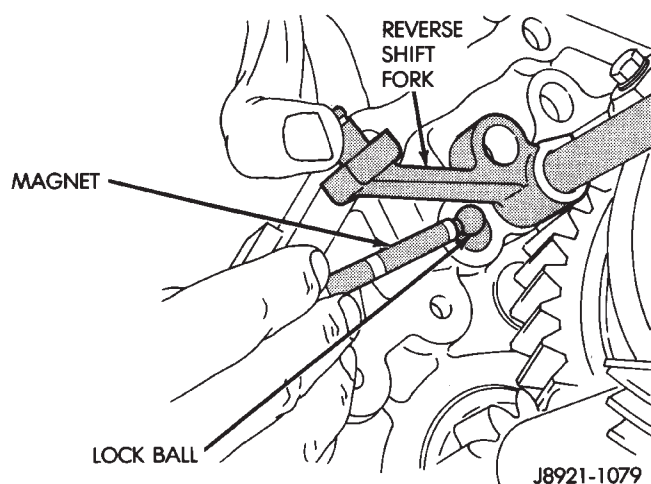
Install Fifth Gear Shift Rail Lock Ball
